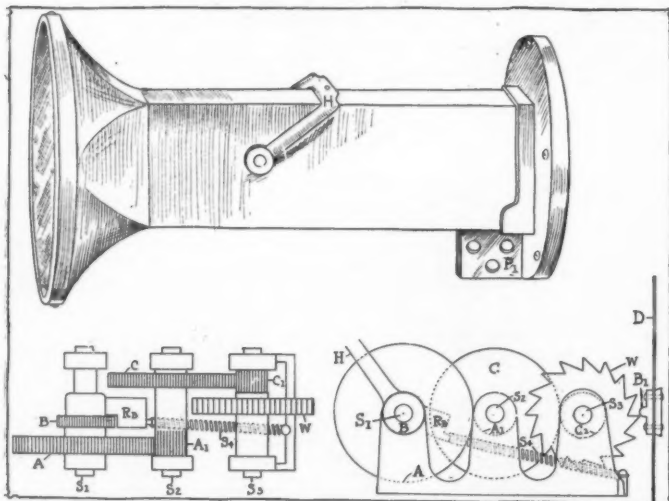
Outside view of Reliance hand-operated, ratchet-and-button horn. Fig. 3—Schematic view of gears by means of which horn is operated
